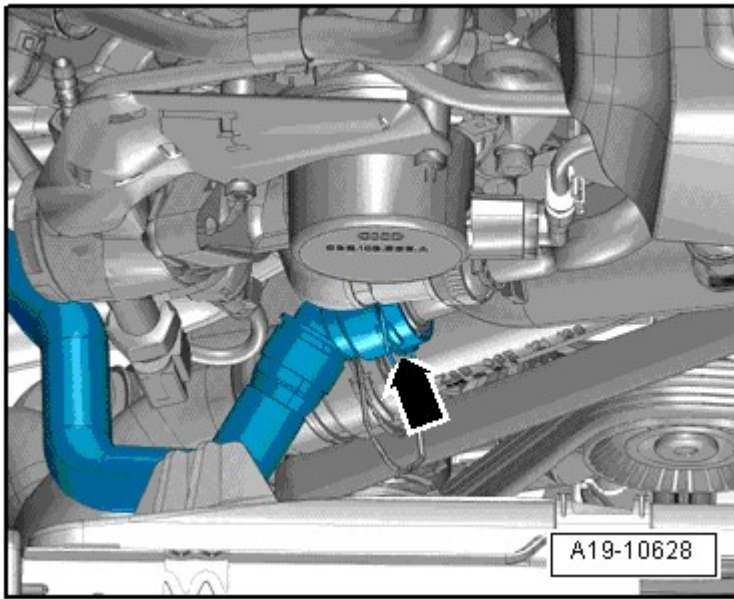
Identifying Clamp And Right Front Coolant Hose -Arrow- To Front Coolant Pipe
